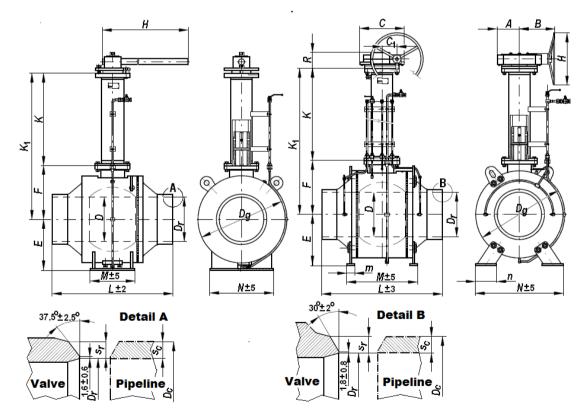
Dimensions which must be known when installing the valves and the configuration of the welding ends of the valves
